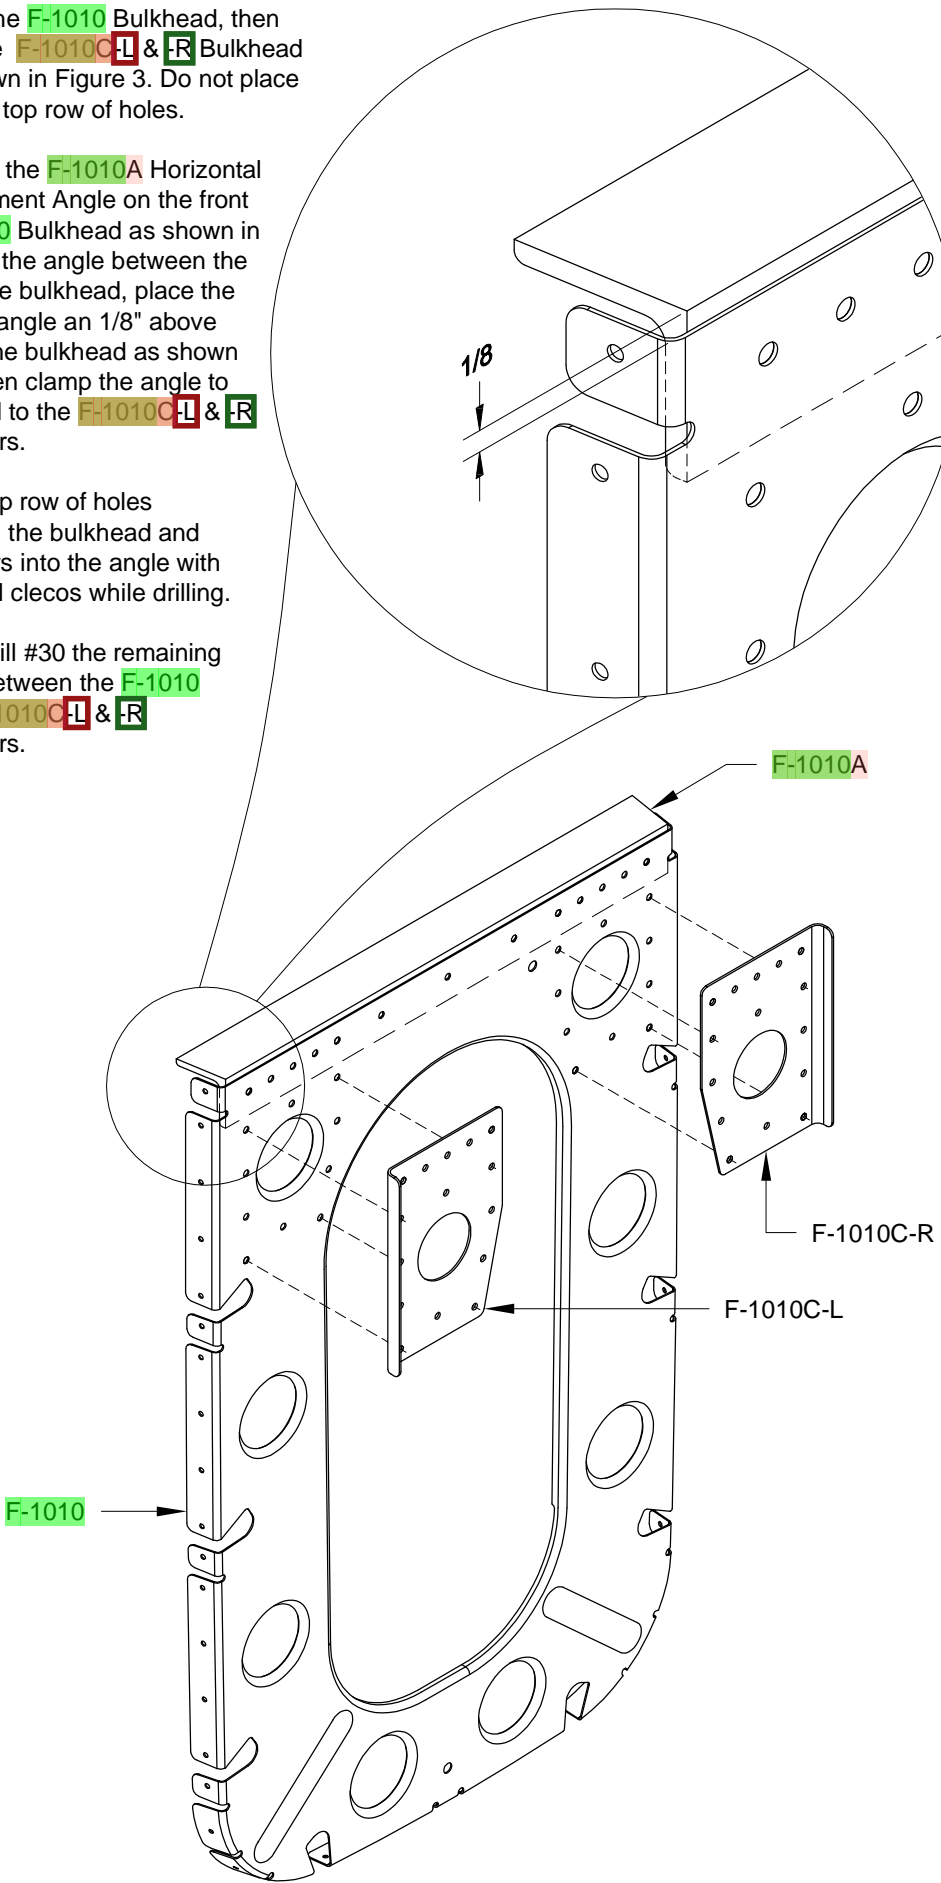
DRILLING THE HORIZONTAL STABILIZER ATTACHMENT ANGLE
